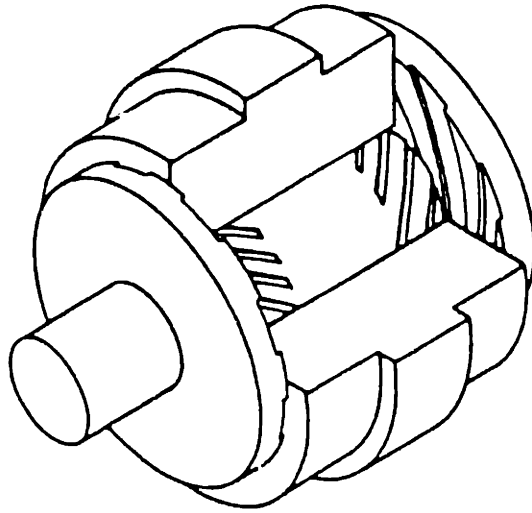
Closed spiral-grooved spool gas bearing: one journal bearing and two thrust disc bearings (from reference [12])
